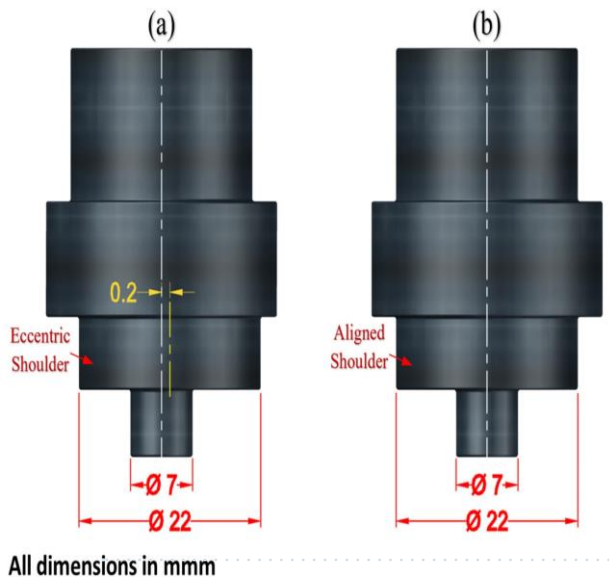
Schematic of the FSW tools: eccentric shoulder and aligned shoulder.
